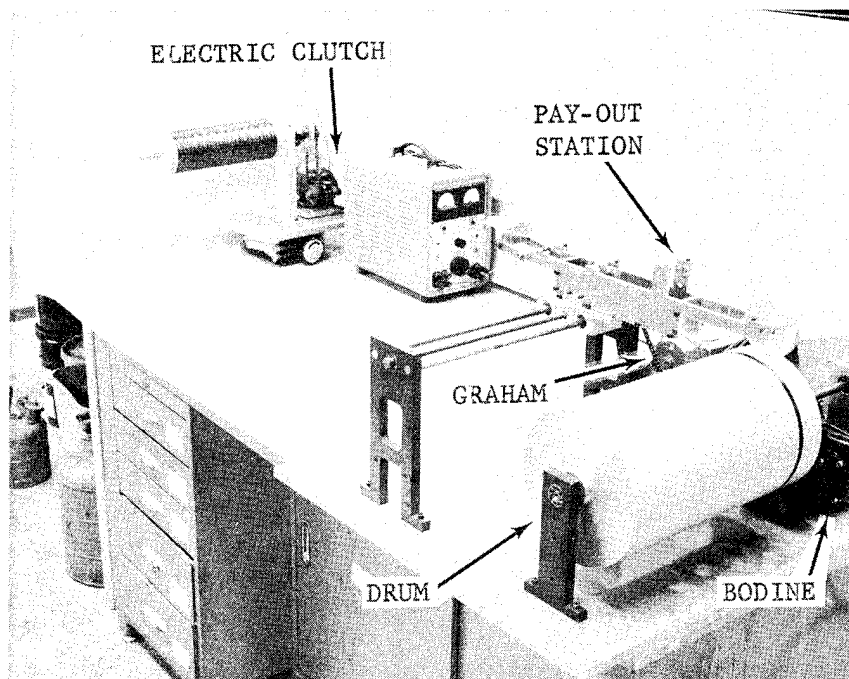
EQUIPMENT SET-UP FOR FABRICATION OF TEST PANELS.
